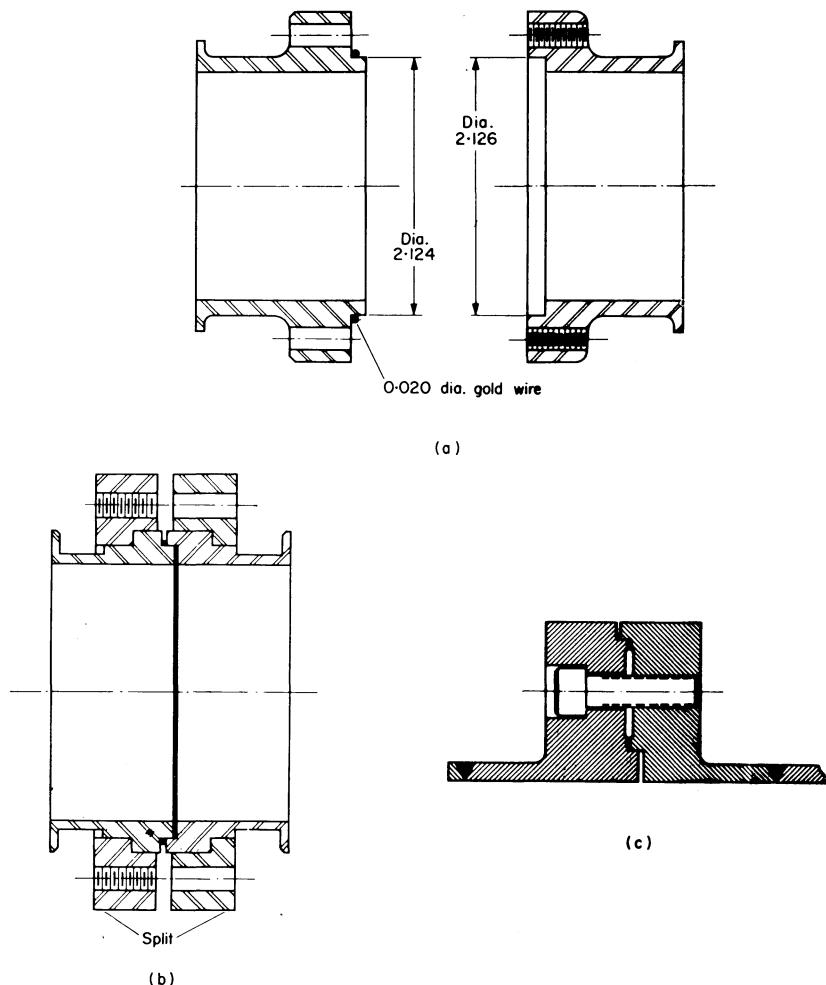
Corner seals: (a), (b) simple seal (after Grove⁴⁸⁹); (c) double seal (after Mark⁸⁰³).
